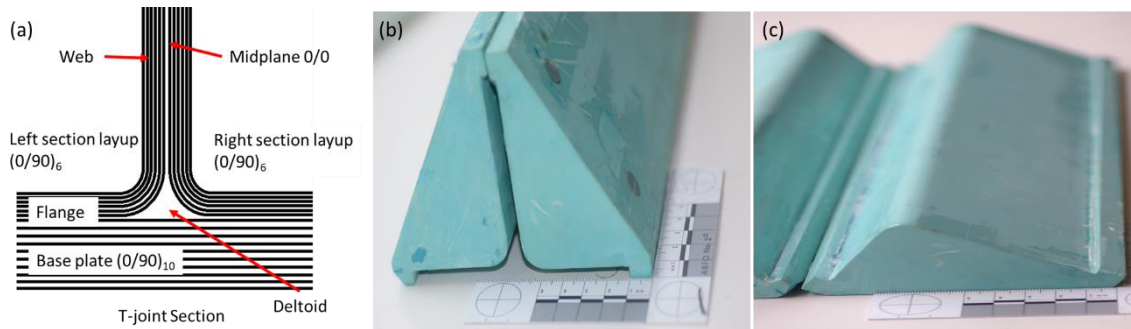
(a) Ply layup and T-joint technical nomenclature (b) Assembled T-joint forming tool, (c) disassembled T-joint forming tool.
